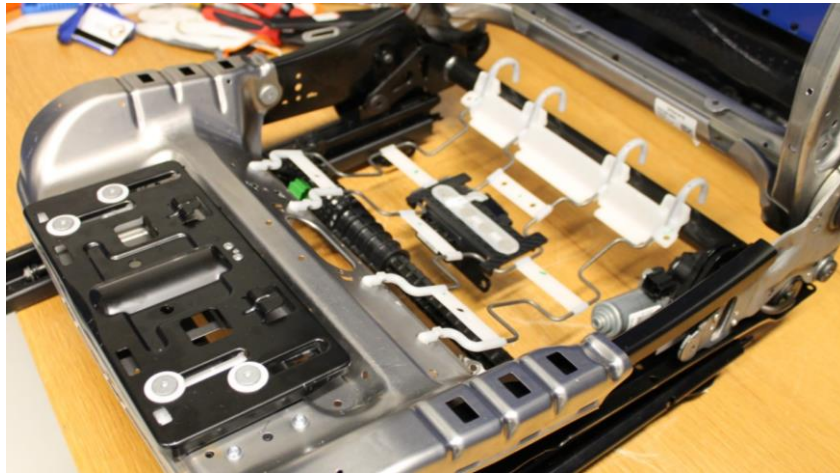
Zig-zag formed springs on the Volvo seat frame.
